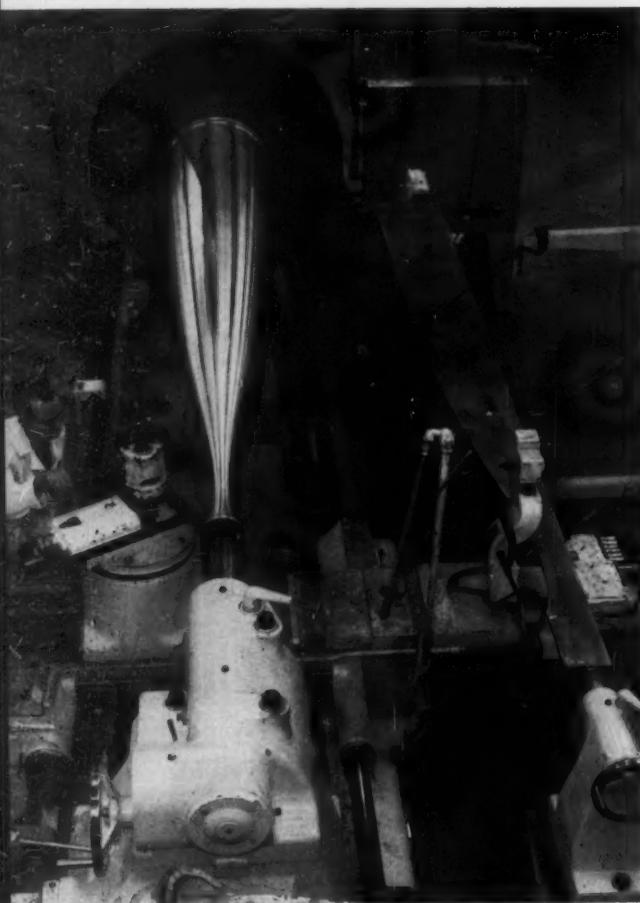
Finish Machining of Mandrel on Tracer Lathe Was a Three-Week Job. Templet at right has stylus-bearing surface with a coating of molybdenum disulphide as a lubricant
